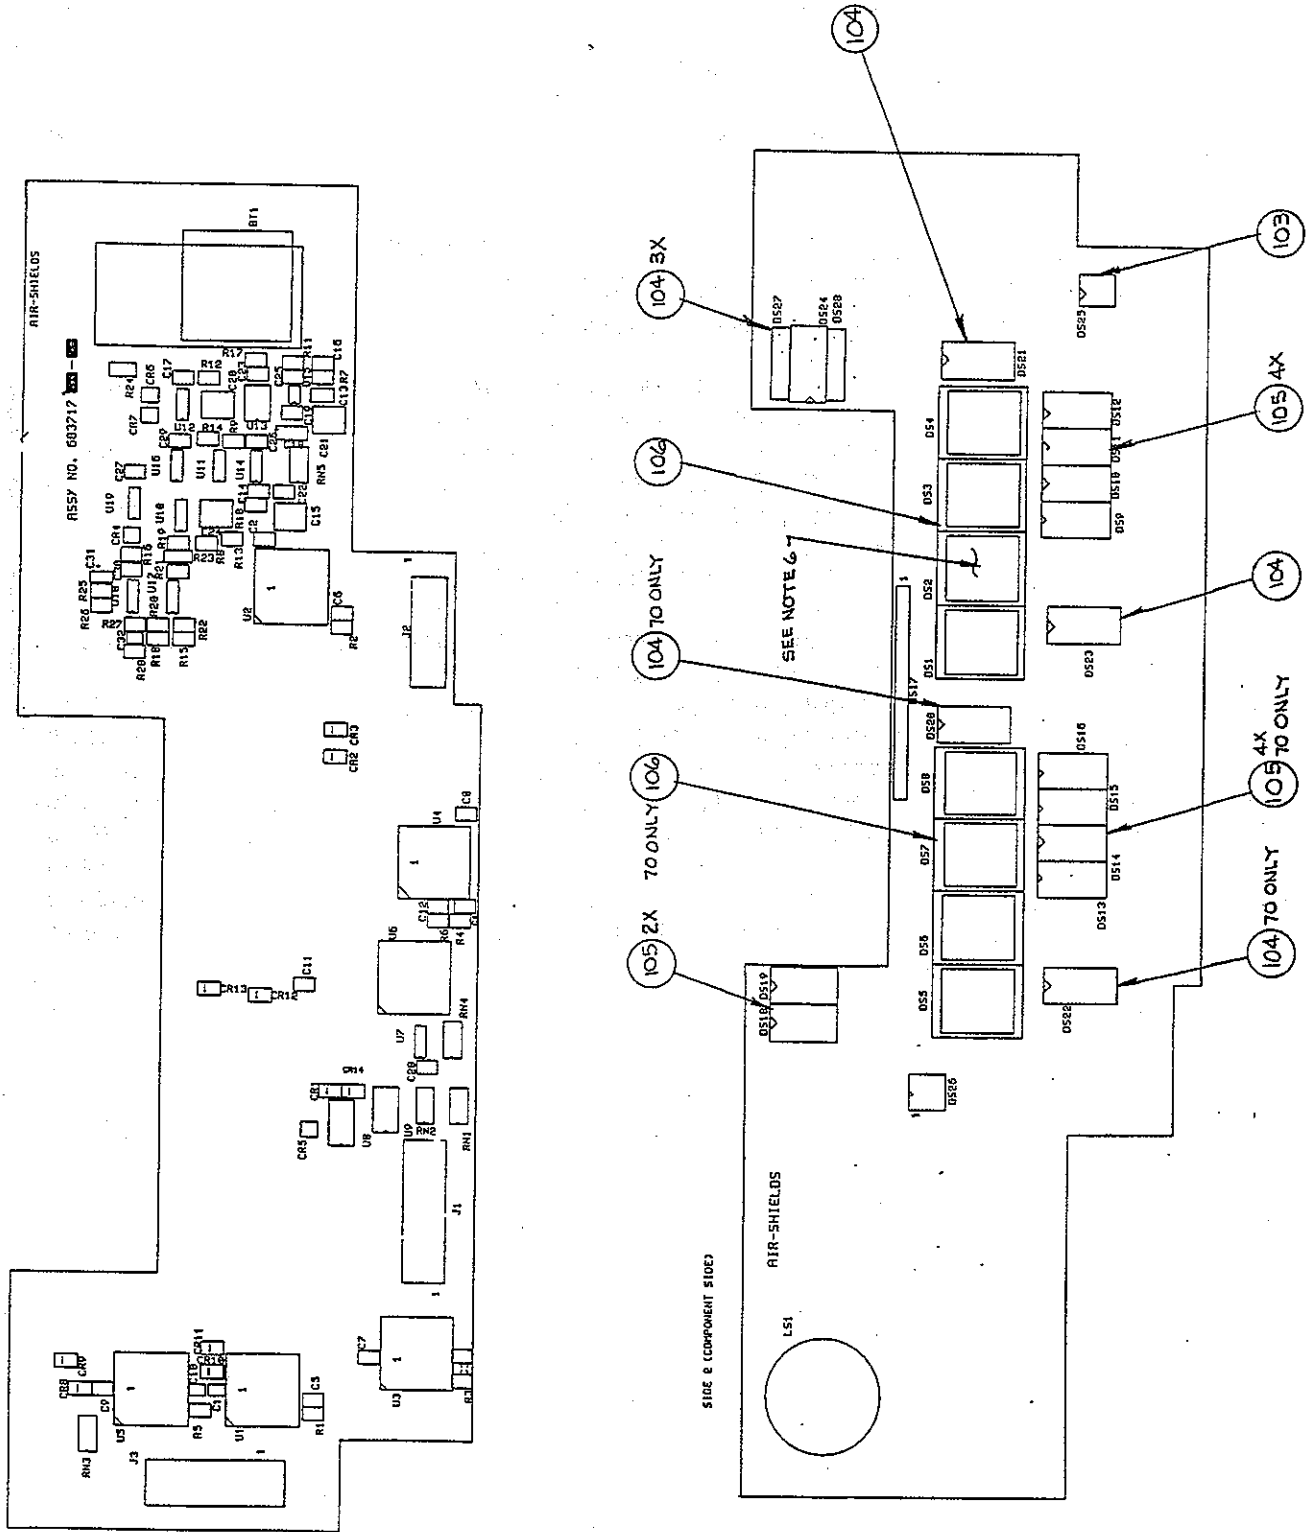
PARTS LOCATION DIAGRAM, DISPLAY BOARD
